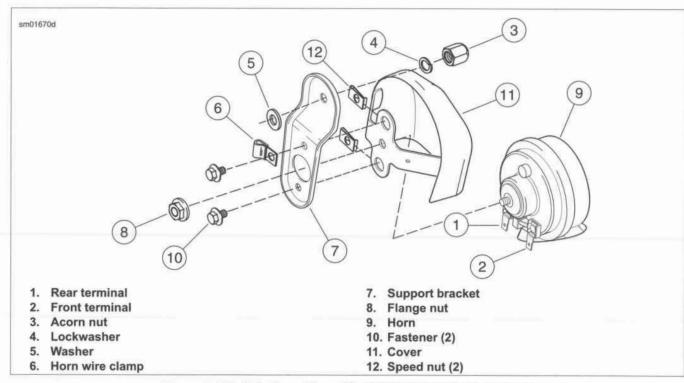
Side Mount Horn: XL 1200C/CP/CA/CB, XL 1200T/V
